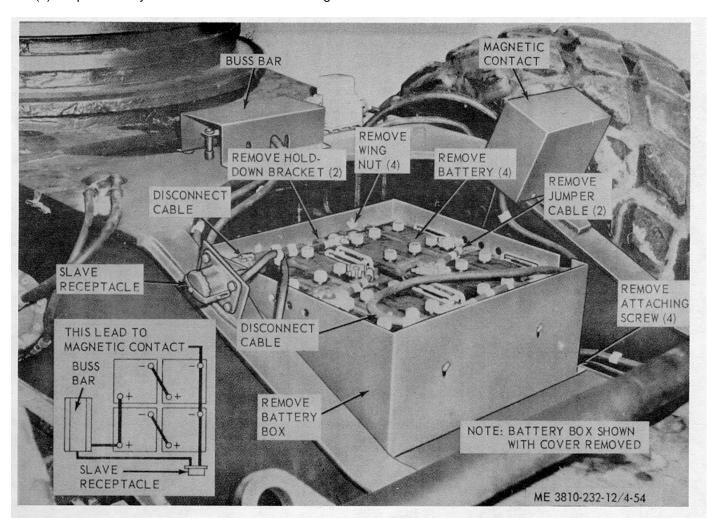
Carrier battery box, batteries and cables, removal and installation ({model 2885}).
